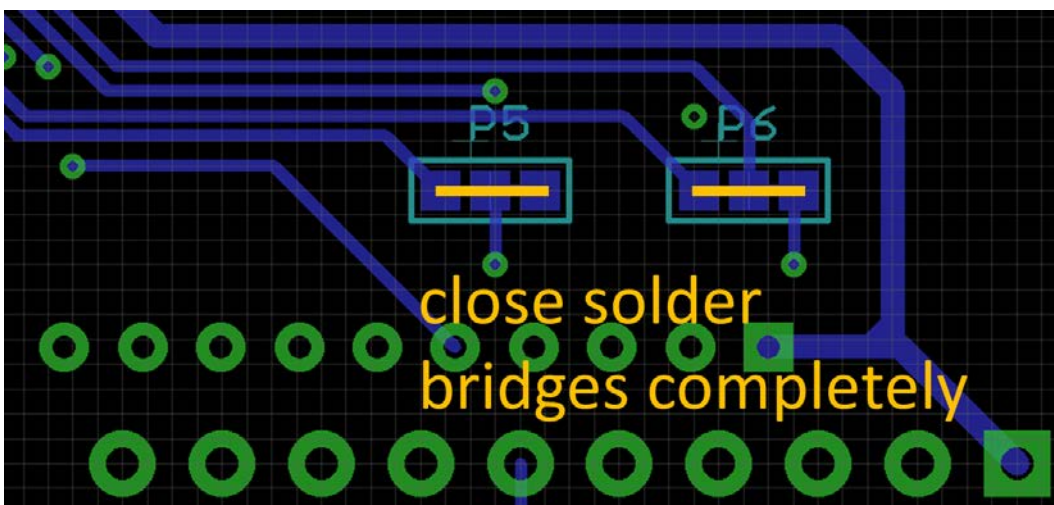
Close solder jumpers P5 and P6 completely. Connect all adjacent pads.
